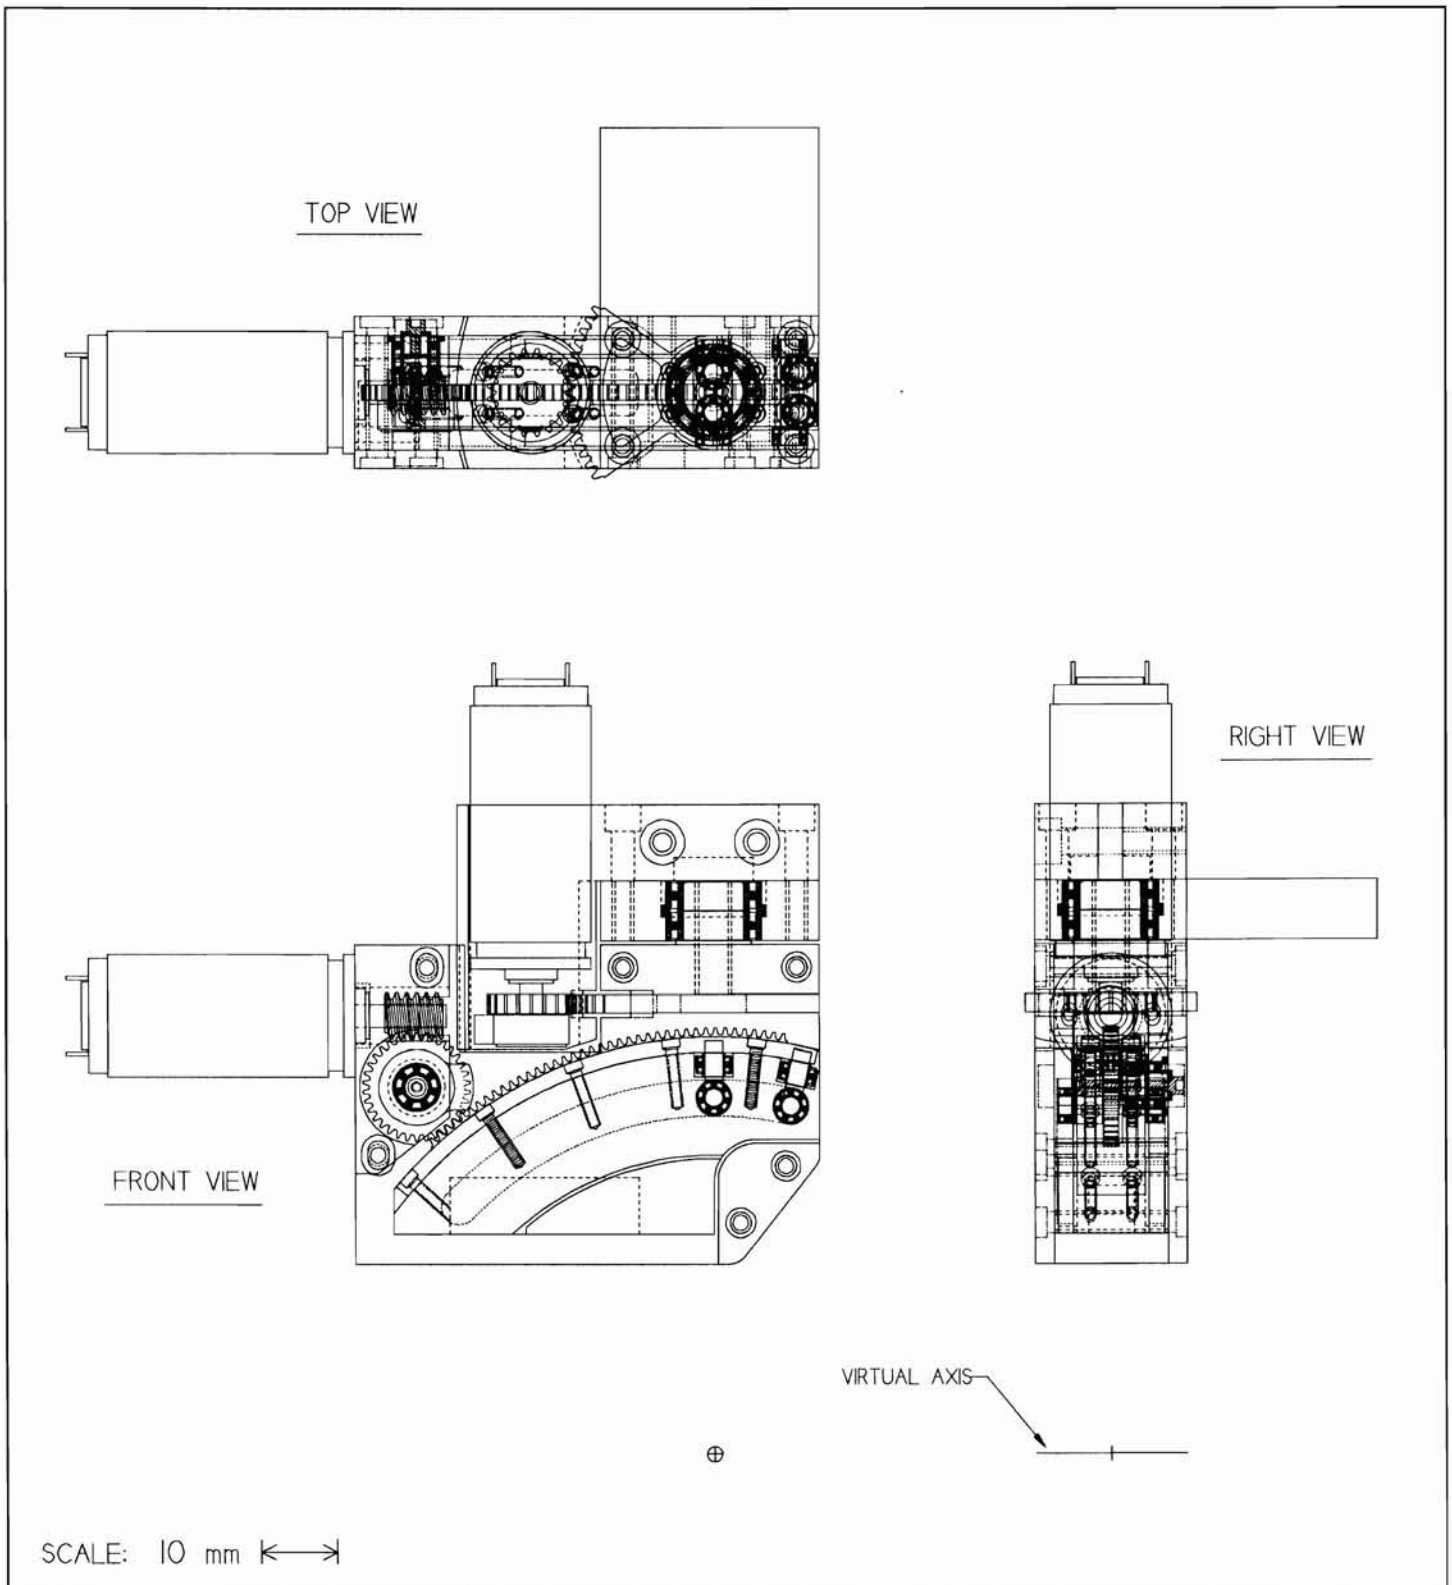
Composite CAD drawing representing the final state of the integrated design for the Phase-II glove controller thumb joint. Enlargements of these views are shown in the next three figures, and details of the components shown in Appendix D. (Dwg. GLOVE005.GCD)
